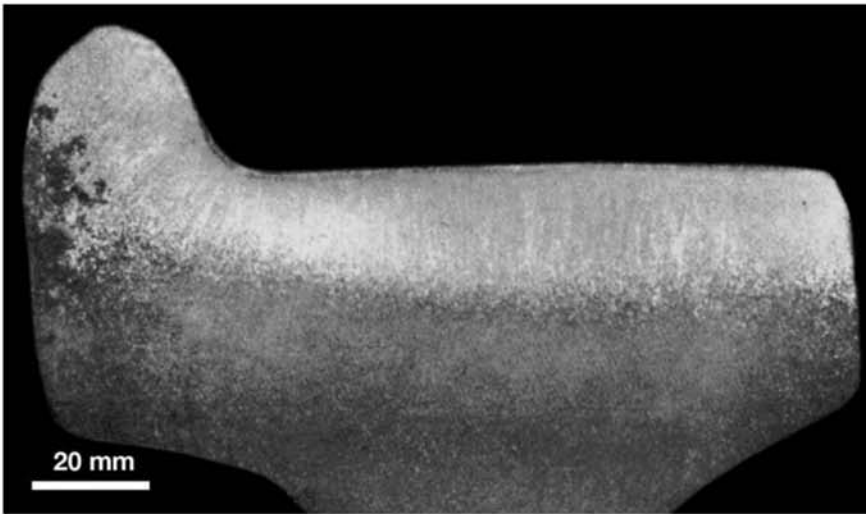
Cross section of a wheel in chilled cast iron. The chilled layer is thinner than that in Fig. 17.62. To the left (inner portion of the flange), some casting defects can be seen. The wheel has been cast with its axis in the vertical position and the flange in the upper portion of the mold, where the defects happened. Etchant: iodine.
